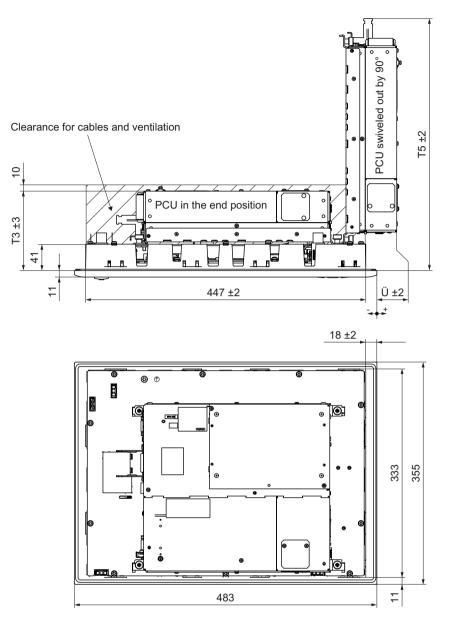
Attaching the PCU to the TP 015A operator panel front
